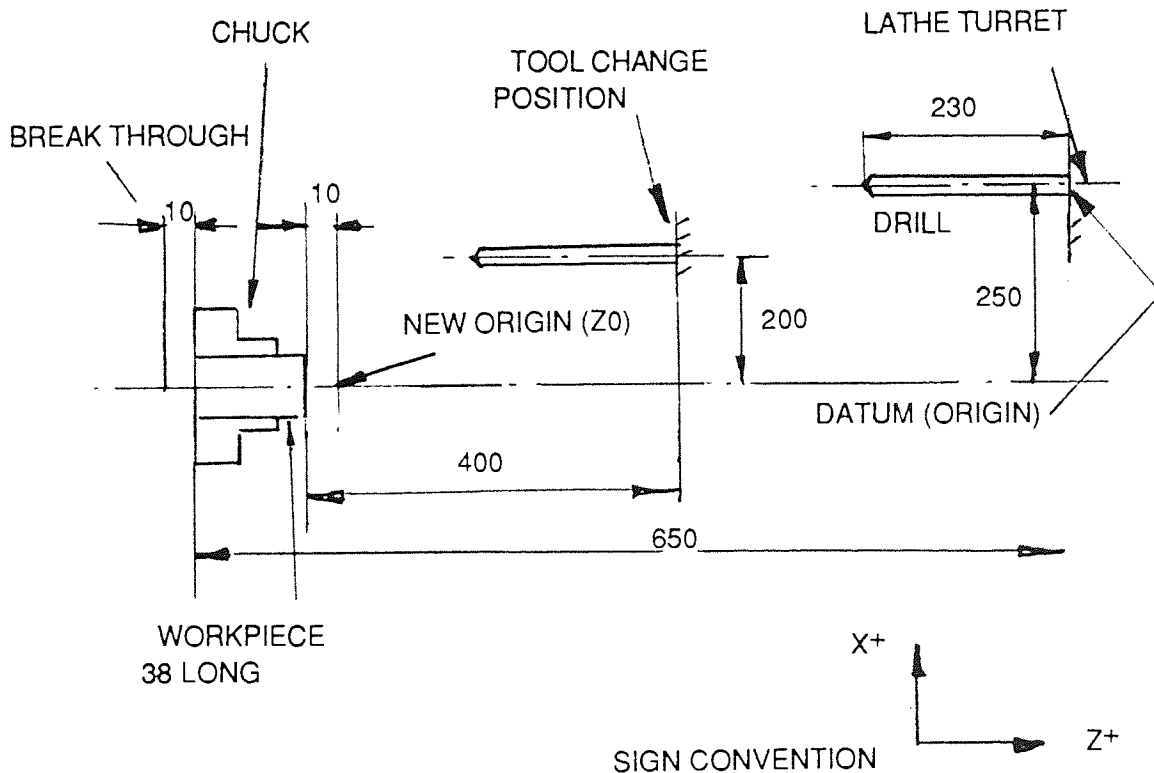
CNC LATHE - PLAN OF SET UP FOR DRILLING WITH COOLANT FED DRILLS
